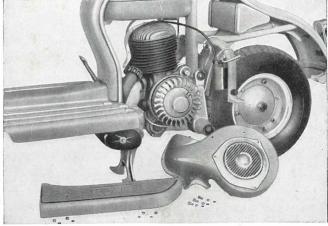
How to remove the side boards and the baffle plate, flywheel magneto side.
